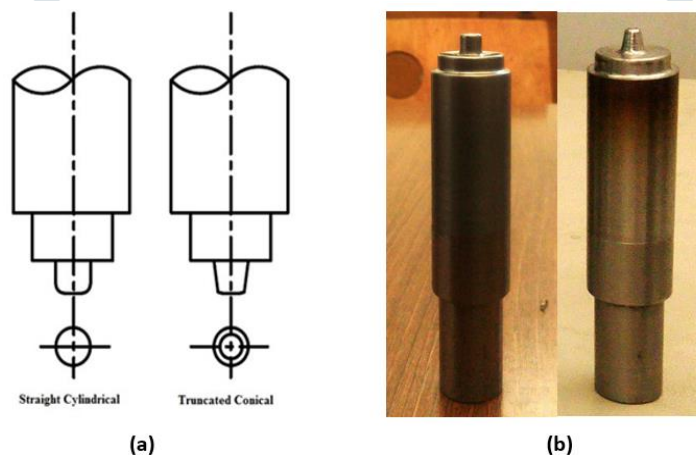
Tool Profiles used (a) Cylindrical, (b) Conical
